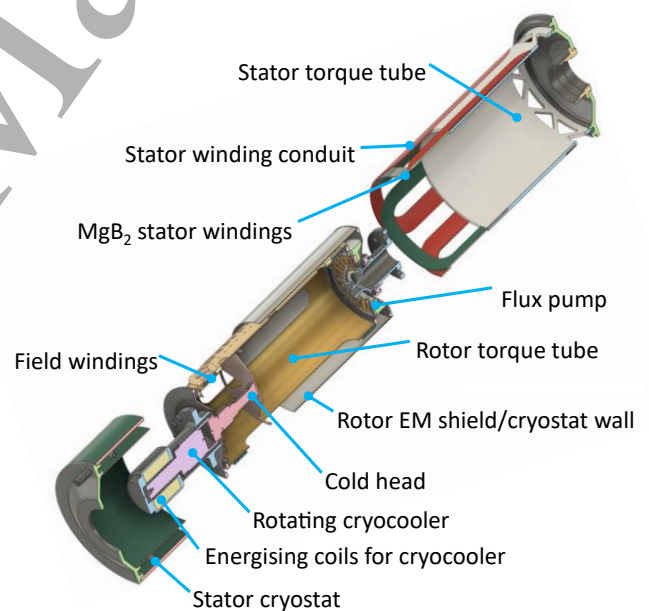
Exploded section layout of 3MW motor with conduction cooled rotor.
